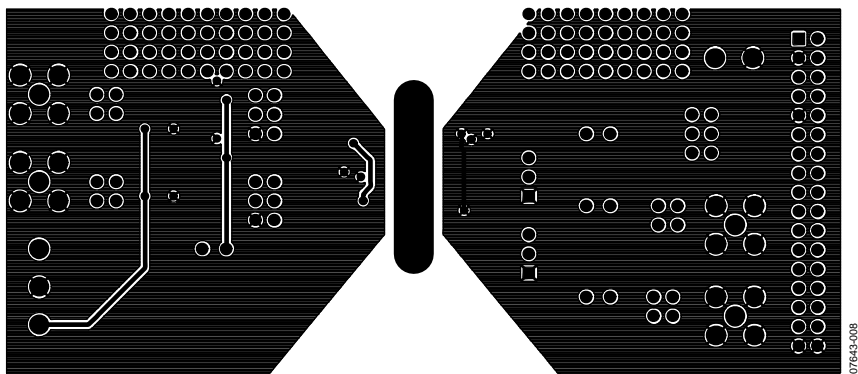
Solder Side Artwork for the EVAL-AD7401A, 16-Lead SOIC Package
